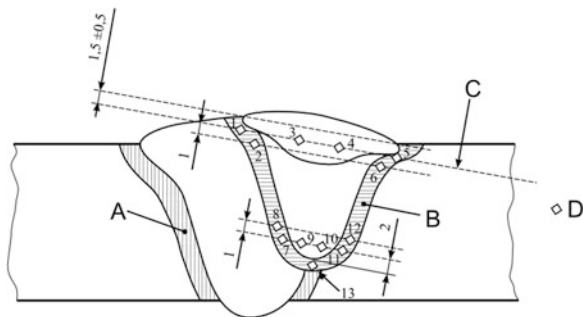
Repair and partial penetration welds survey method for Vickers Hardness Measurement (dimensions: mm). (Source: NACE MR0175/ISO15156, Part 2). Key: A original weld HAZ. B repair-weld HAZ. C parallel lines of survey. D hardness impressions: Impressions in the HAZ should be located as close as possible to the fusion boundary. The top line of survey should be positioned so that the HAZ impressions coincide with the HAZ of the final run or change in profile of the cap of fusion line associated with the final run
